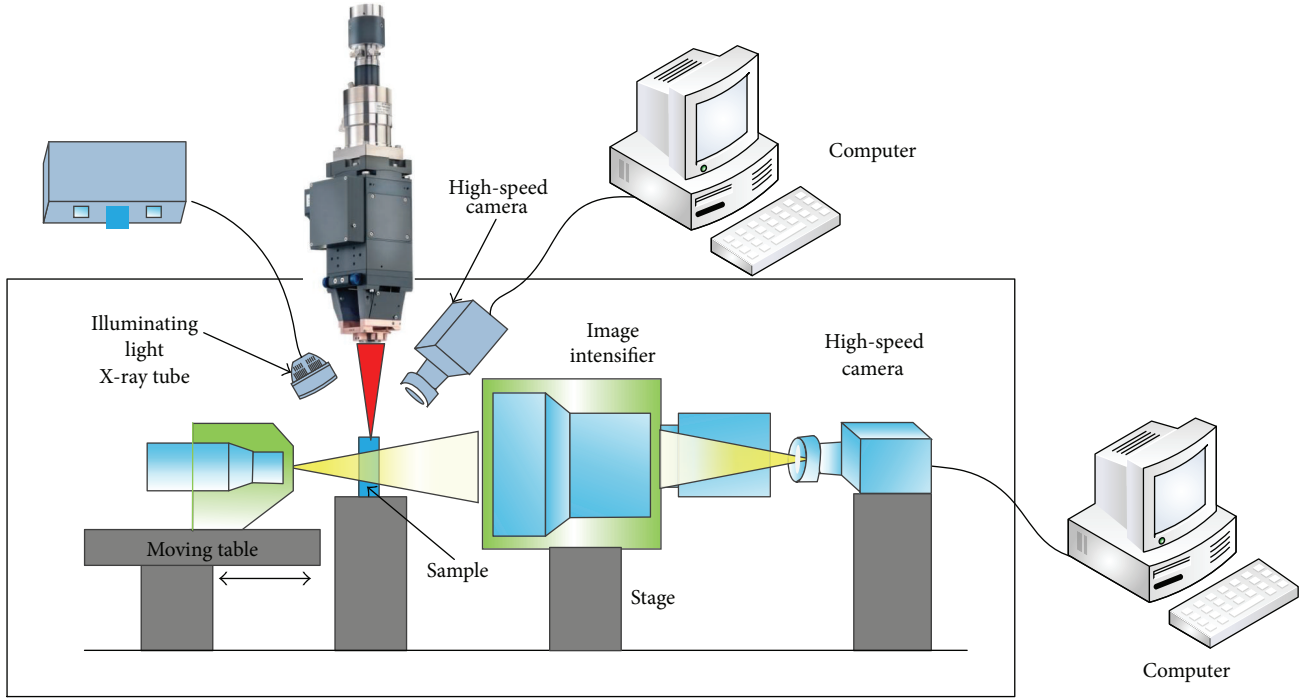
Welding setup of laser focusing optics, high-speed video camera, and X-ray device.
